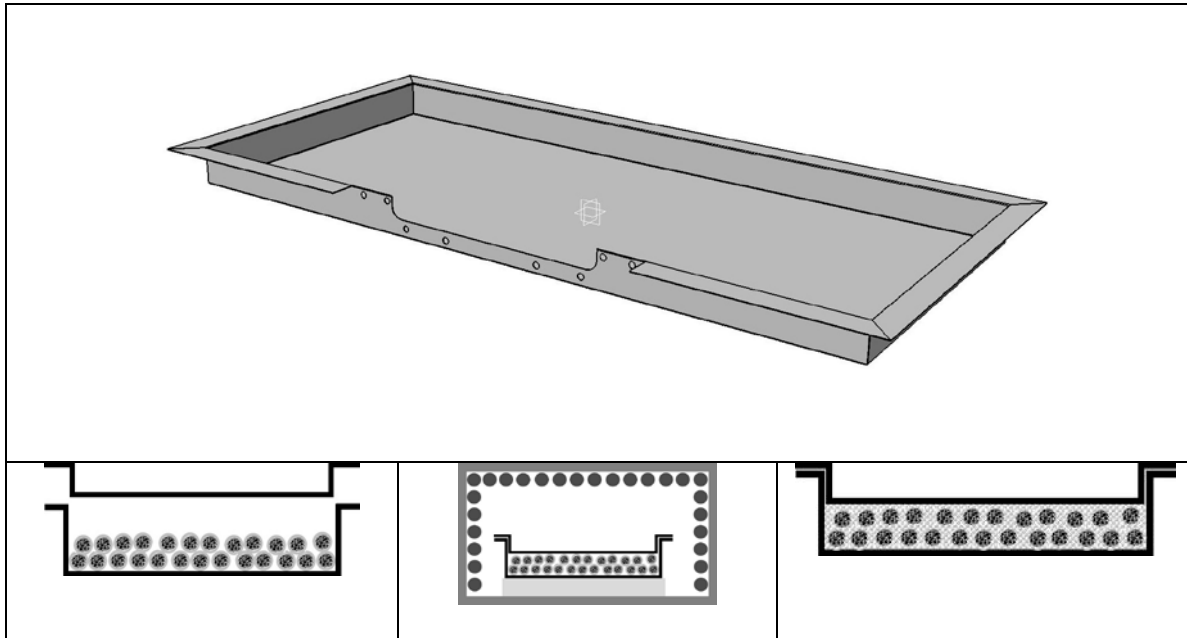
Above: CAD drawing of the bottom part of the SmartBatt battery housing, below: Schematic depiction of the production of the bottom parts of the battery housing: separate pan-like face sheets with filling of coated APM granules, curing of the closed sheets, final component with local sandwich structure (from left)
